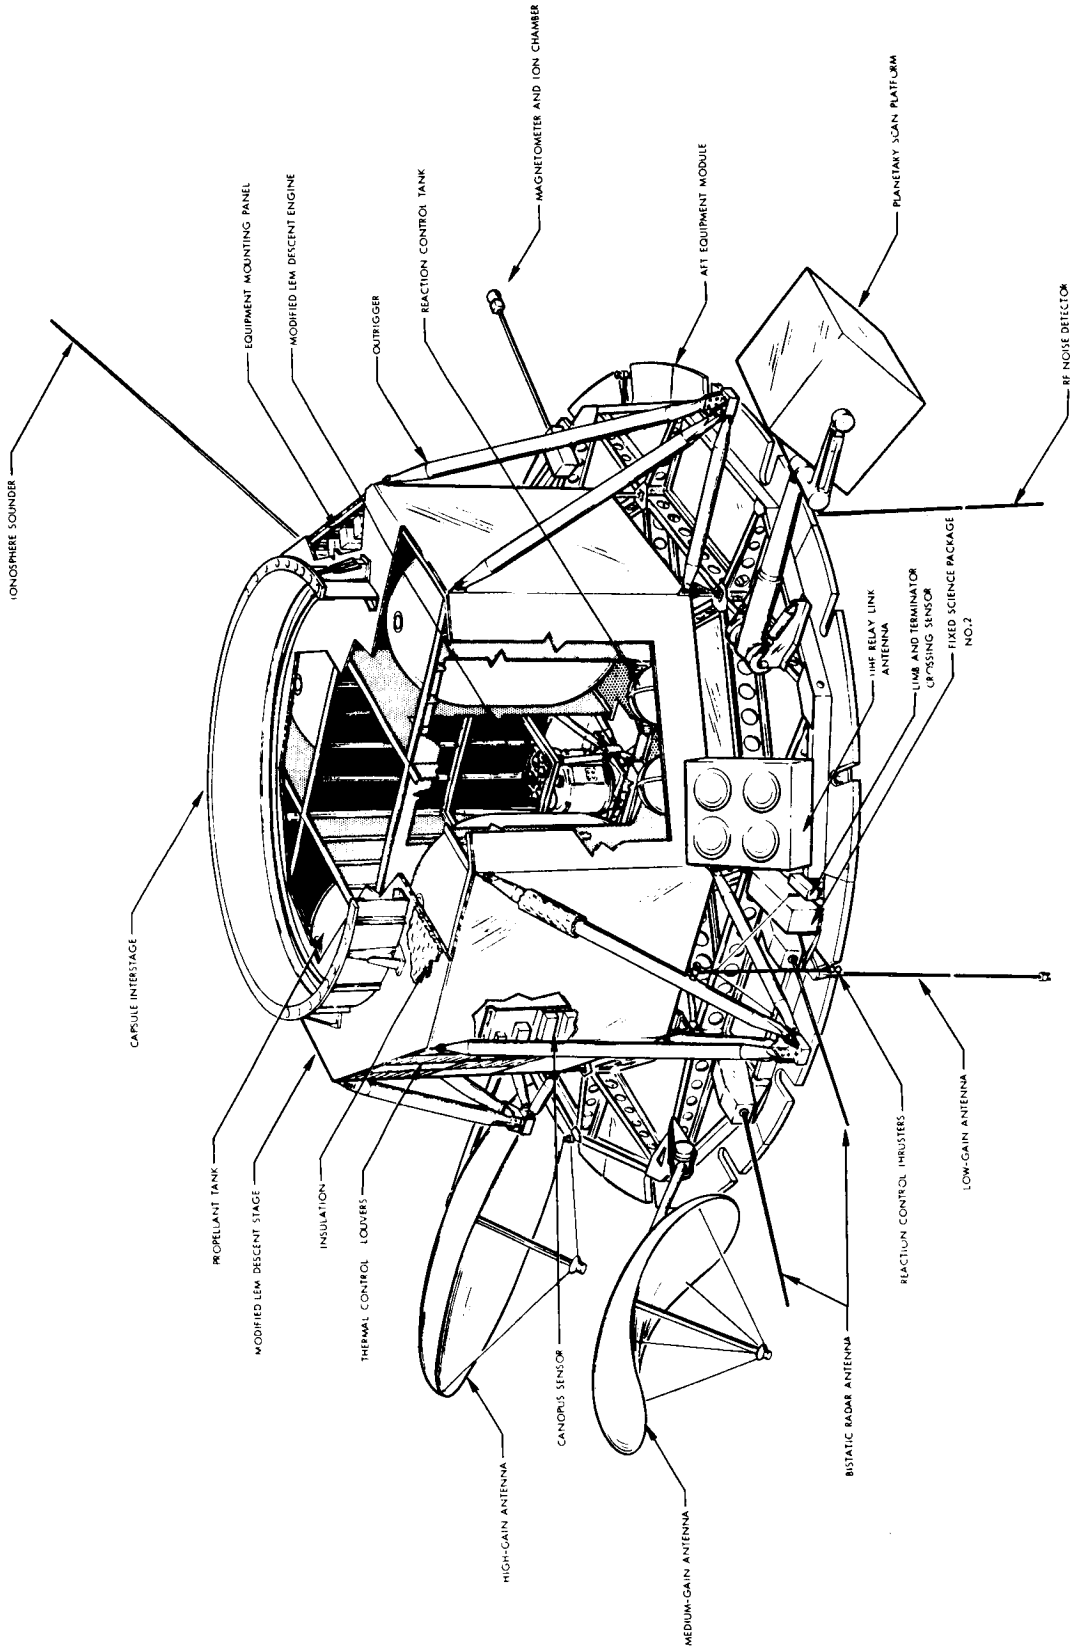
1971 Voyager Spacecraft—In-flight Configuration Isometric Drawing
